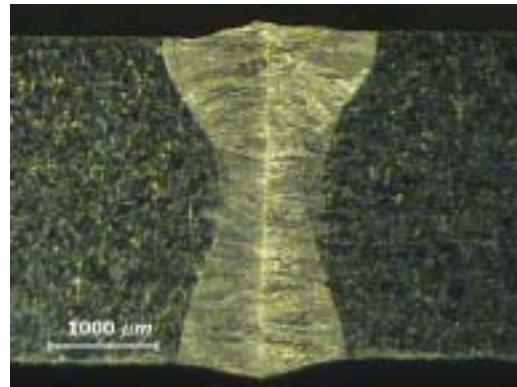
Butt welding Cross-sectional area of the laser beam power at $P=1.6kW$, $v=1.0m/min$ and $z=-0.5mm$
